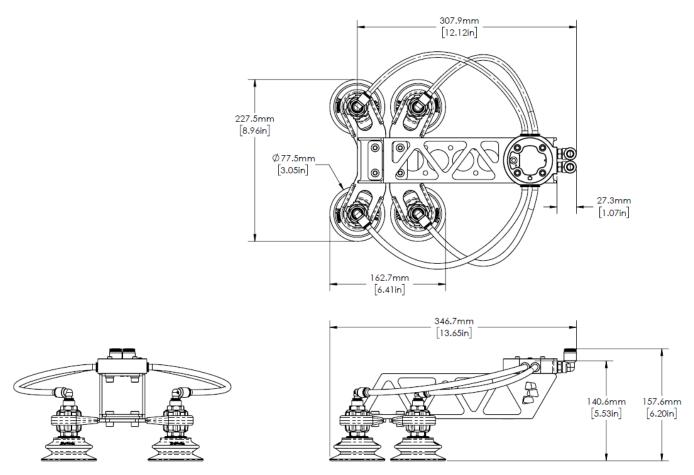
Technical Dimensions of PowerPick10 Gripper (Default Configuration)
